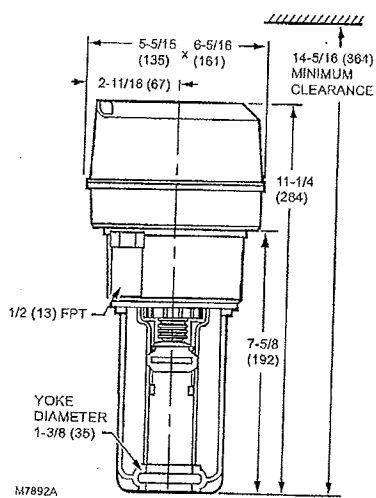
Approximate Dimensions of ML6425, ML7425 Electric Linear Valve Actuator in in. (mm).
